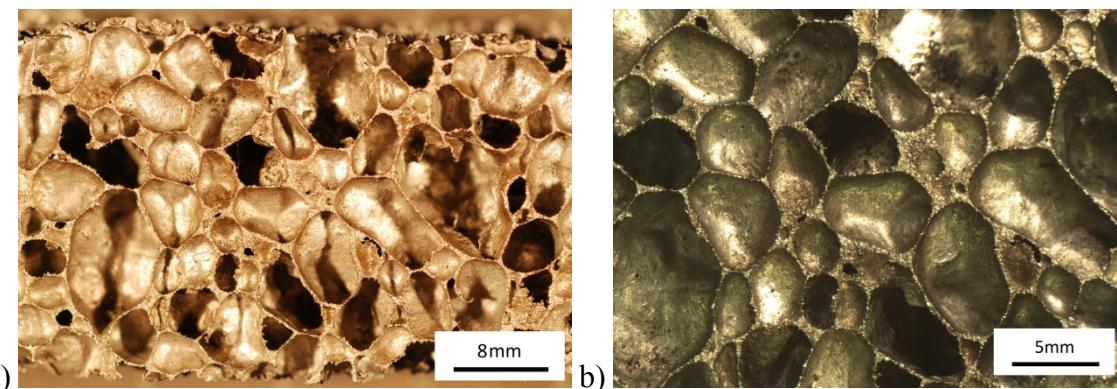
a) and b) Macroscopic images of the surface after band saw mechanical cutting
